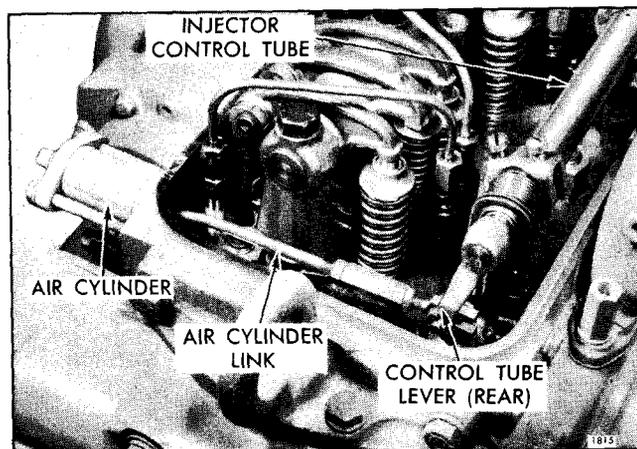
Air Cylinder Used with Fuel Modulating Governor
